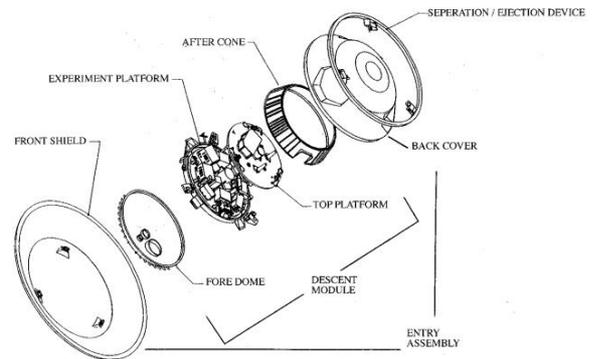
Exploded view of the Huygens Probe. It weighs 319 kg.
